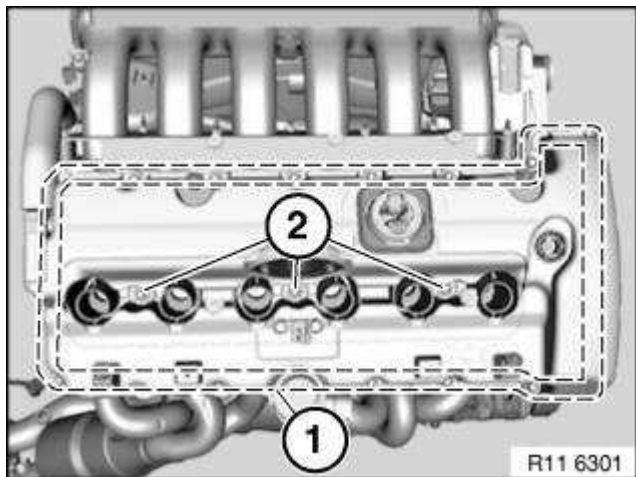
Installation Location Of Screws (1 And 2) Is Specified By The Different Bushing Shapes
